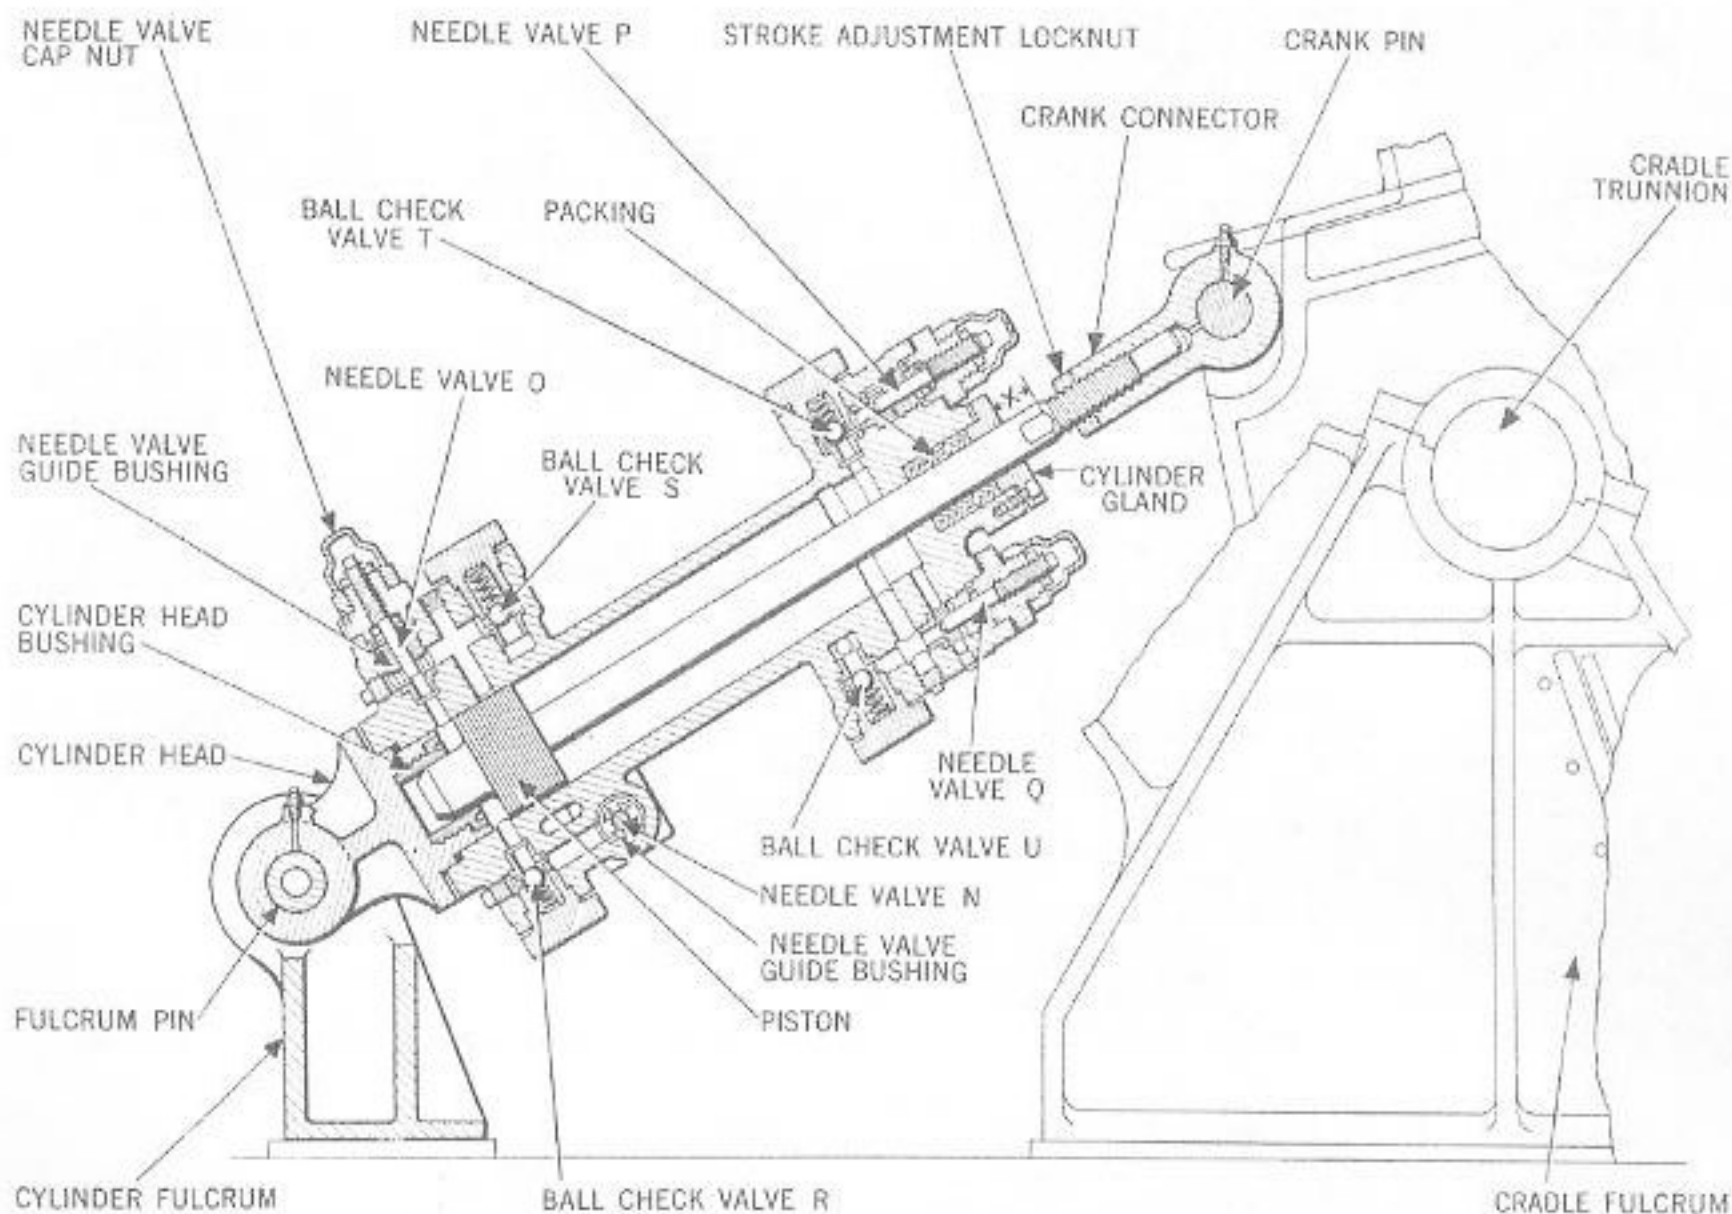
Projectile Hoist Cradle Operating Cylinder - Sectional View
